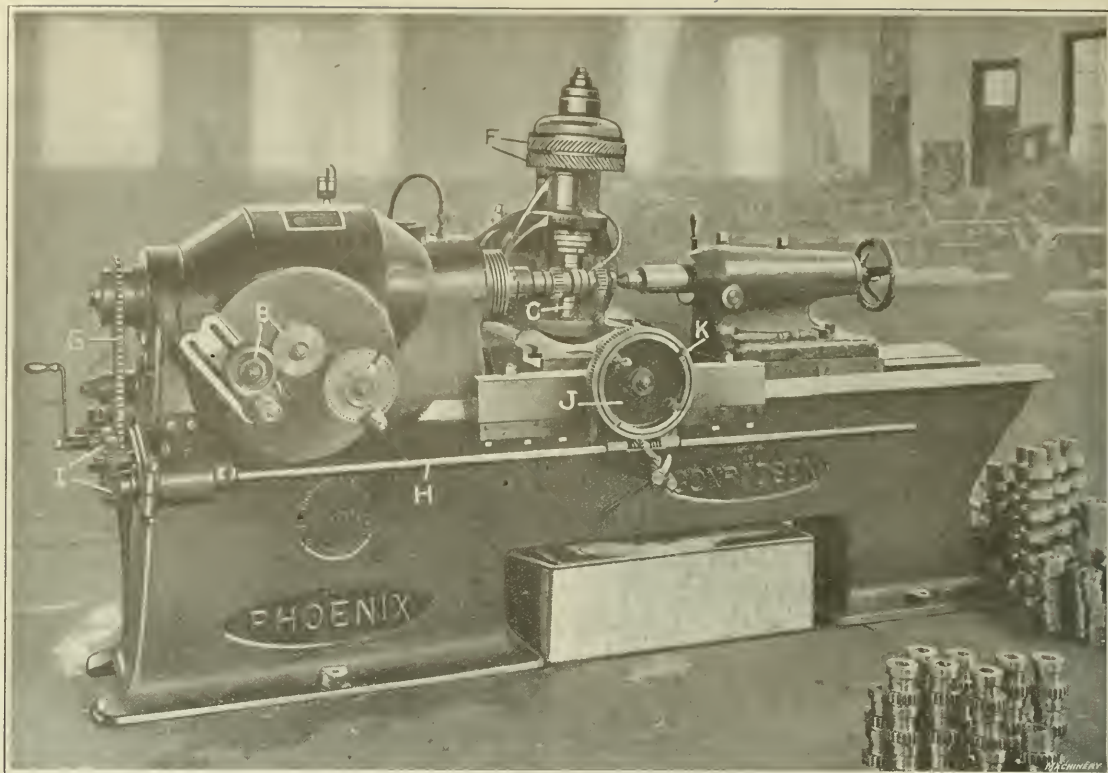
Special Gear-hobber set up for hobbing Small Spur Gears
